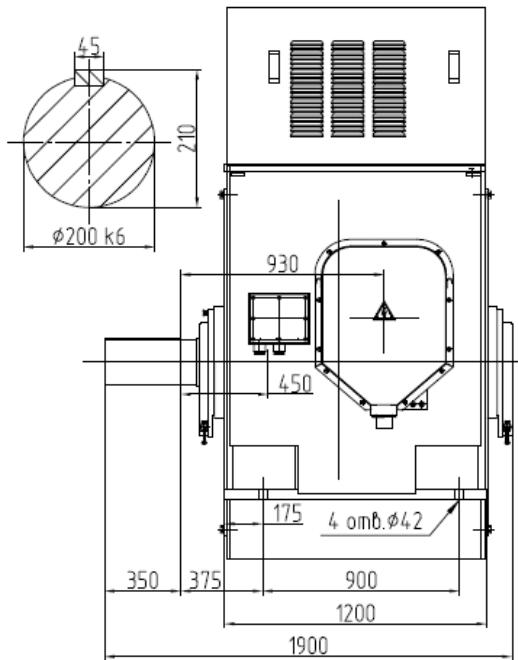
Overall and mounting dimensions of motors АД-500-16TC3.
